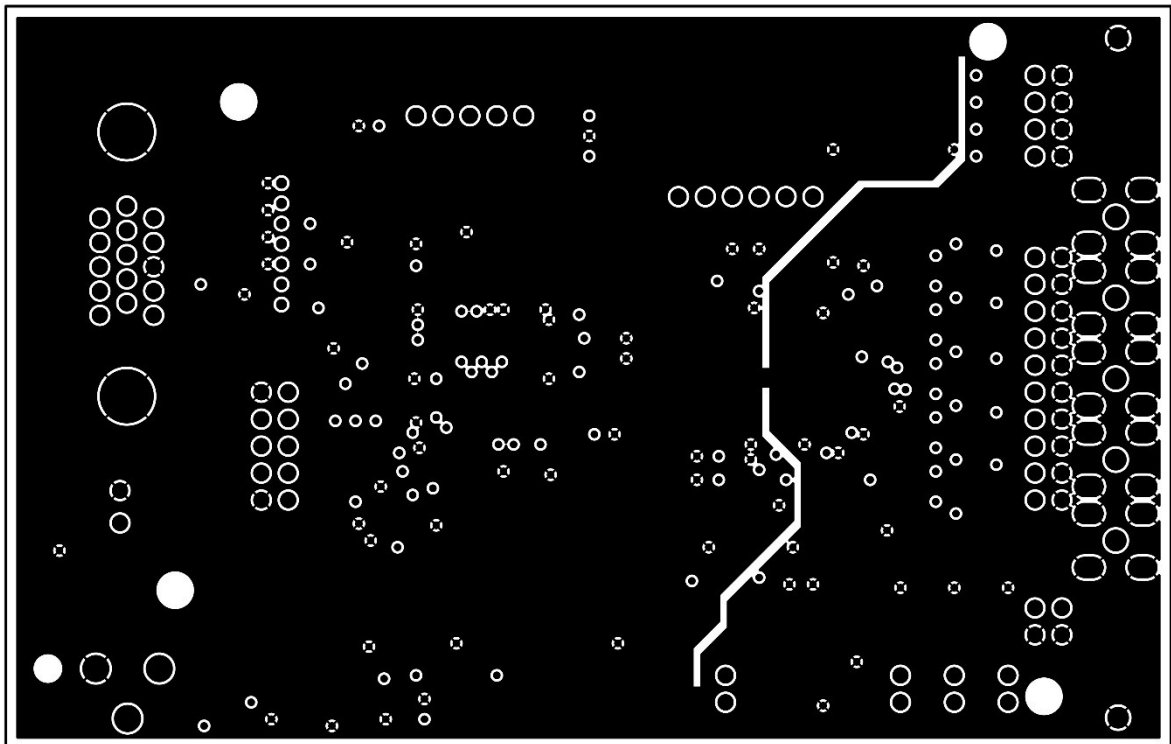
GPX2-EVA BOARD Layout: VDD Layer
